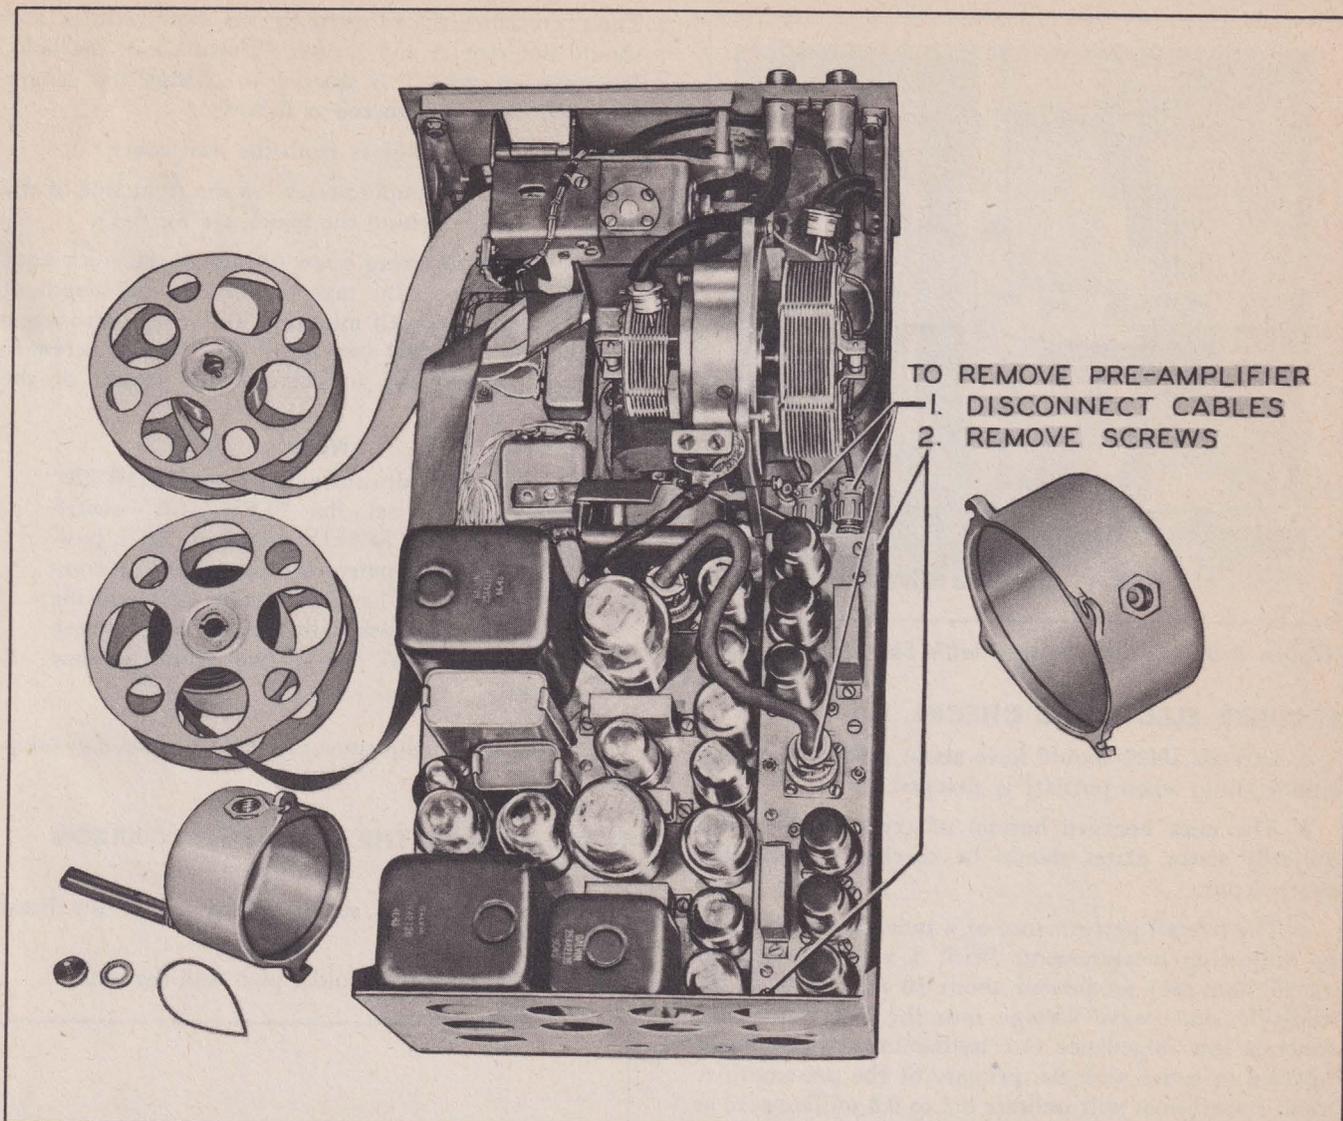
Radar Receiver R-34/APR-2—Top View with Dust Cover, Butterfly Tuner Shields and Tape Reels Removed
